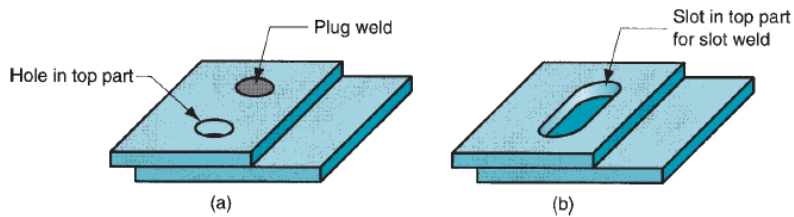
(a) Plug weld; and (b) slot weld.
